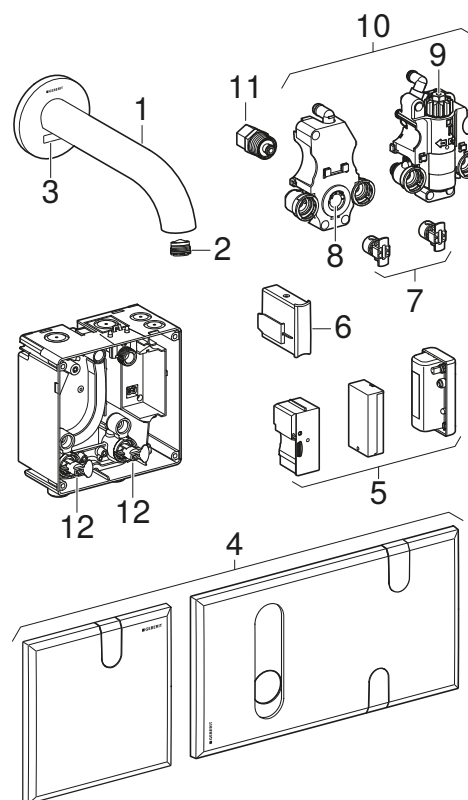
Geberit washbasin taps Piave and Brenta, wall-mounted
